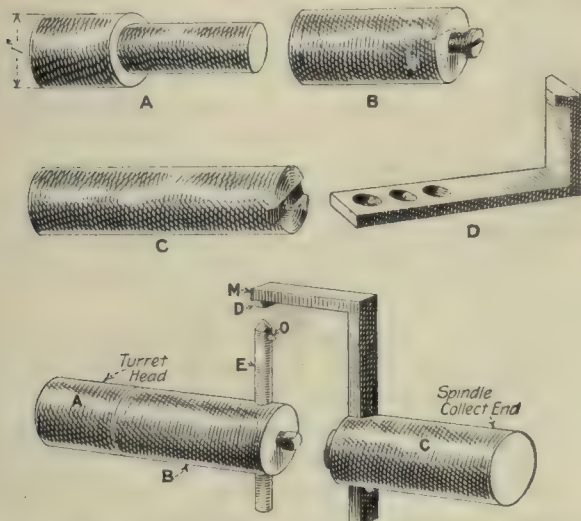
TOOL FOR TESTING SCREW-MACHINE TURRETS AND SPINDLES
